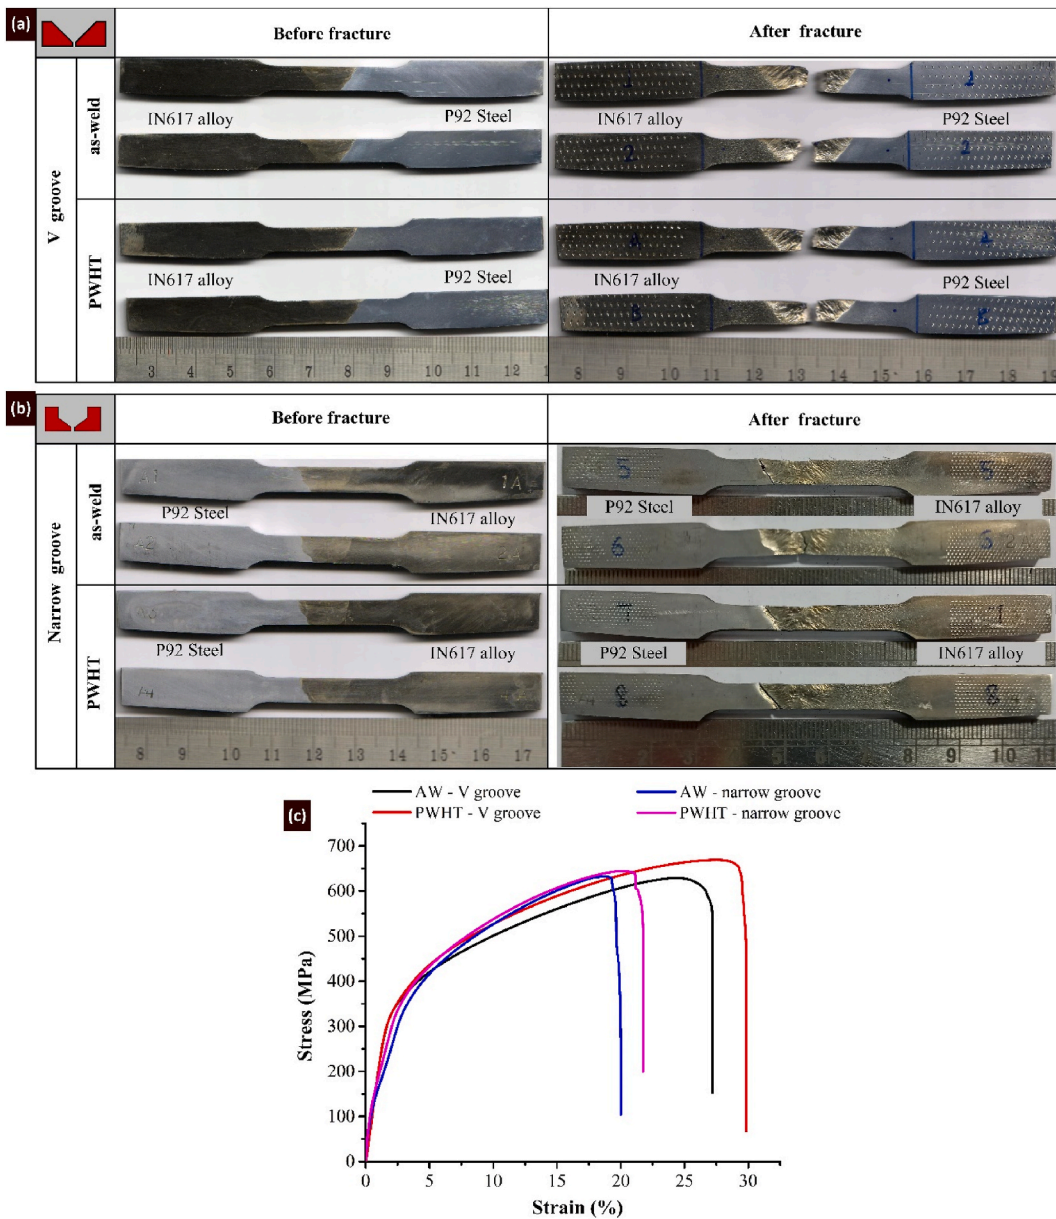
Tensile specimen before and after fracture (a) VG welds joint, (b) NVG welds joint, (c) stress-strain curve.
